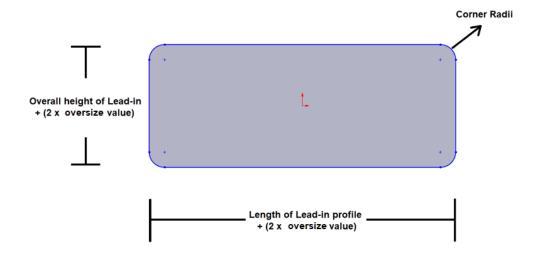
Generic rectangular outlet profile and its dimensions.
